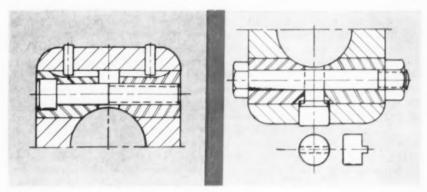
To keep notches in alignment, clamps can be keywayed for two straight pins.
